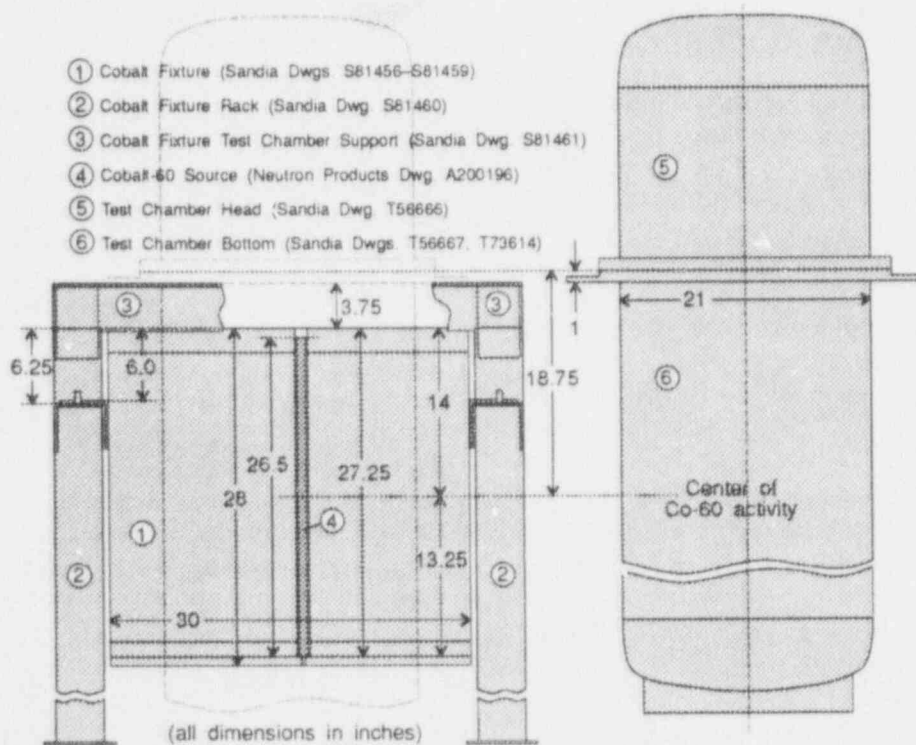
Sketch of a test chamber and large chamber cobalt fixture.
